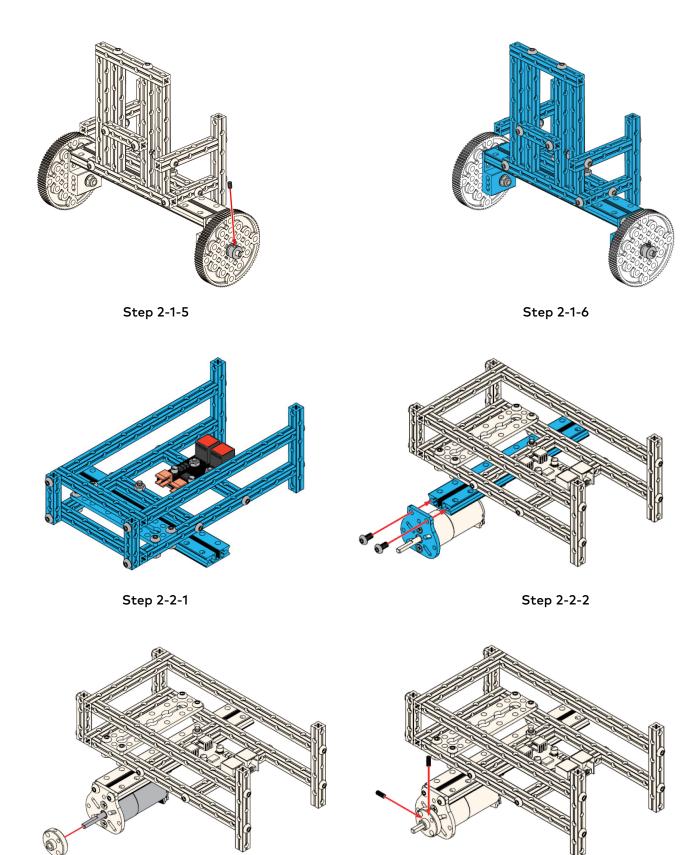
Prototype Design: Making the Emergency Equipment (b)
